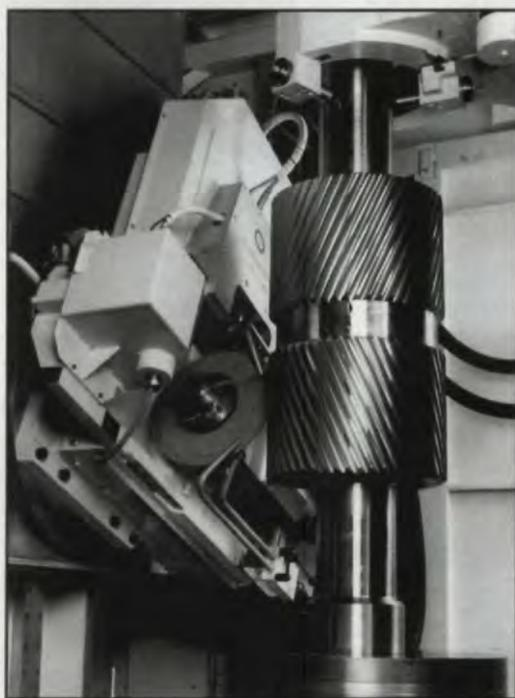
CNC 2-axis integrated dressing unit on a Pfauter 1600 mm profile grinding machine.
